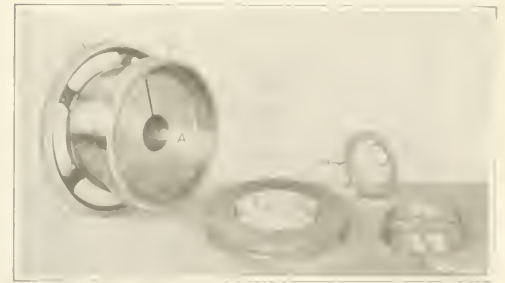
"Pitch Line Control" Type of Chuck for holding Spur Gears
